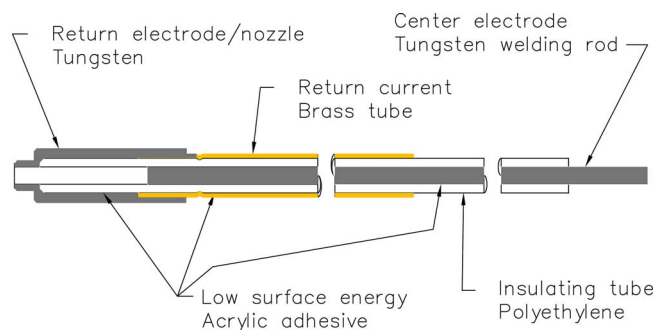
(Color online) Detailed view of internal structure of capillary used in main accelerator. Except for the tungsten nozzle which requires machining, all components are commercial-off-the-shelf items simply cut to length. Internal vacuum seals are achieved using acrylic adhesives.
